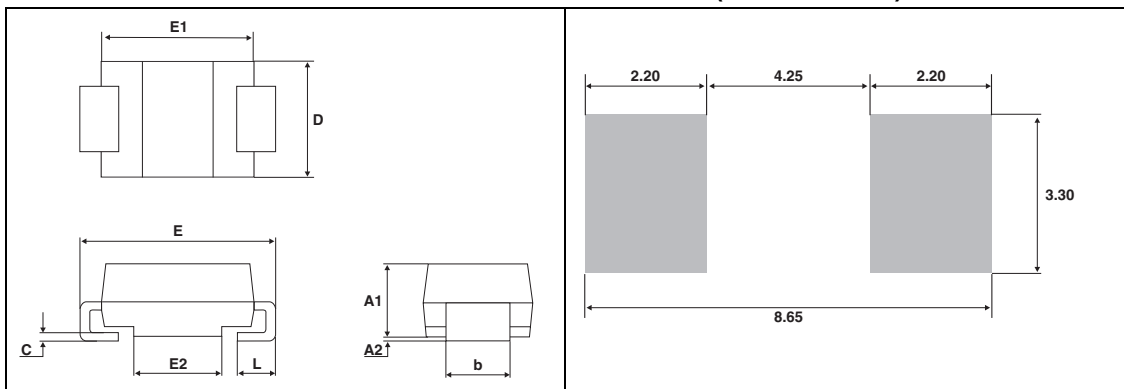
SMB references to dimensions table      Figure 18. SMB footprint dimensions (in millimetres)
